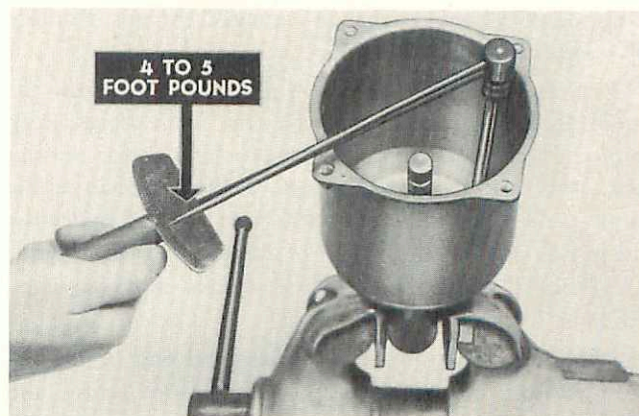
Torque Tightening the Cylinder Shell Cap Screws
